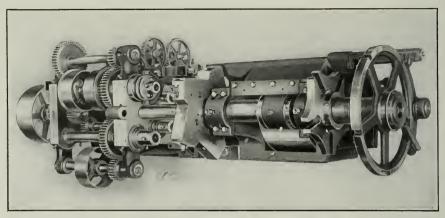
Prentice Multiple-Spindle Automatic Turret Machine
